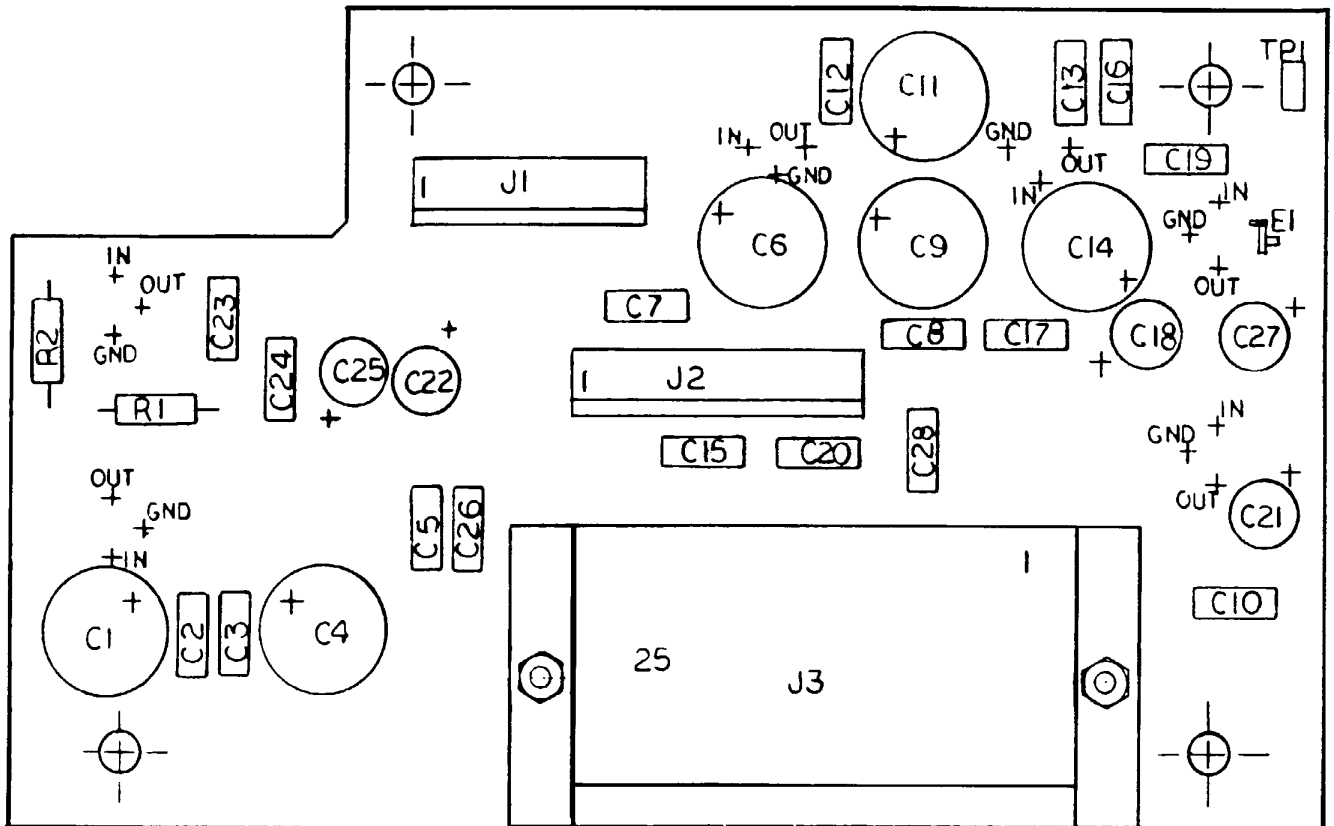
Power Supply Heatsink Assembly A15A2 Component Location Diagram (10073-3250 Rev. D)
